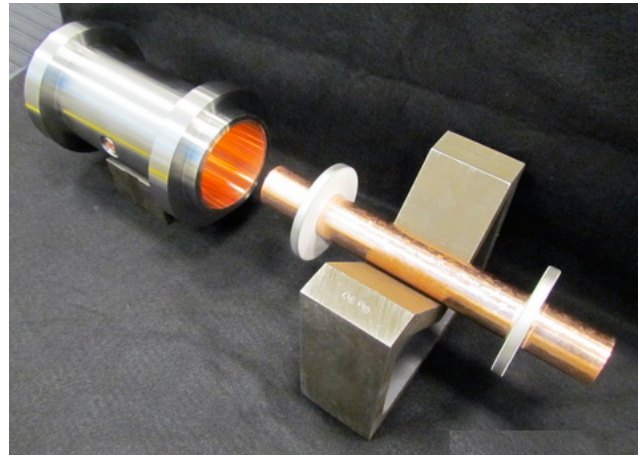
Shown are the inner braze assembly and the machined Explosion Bonded tube.
